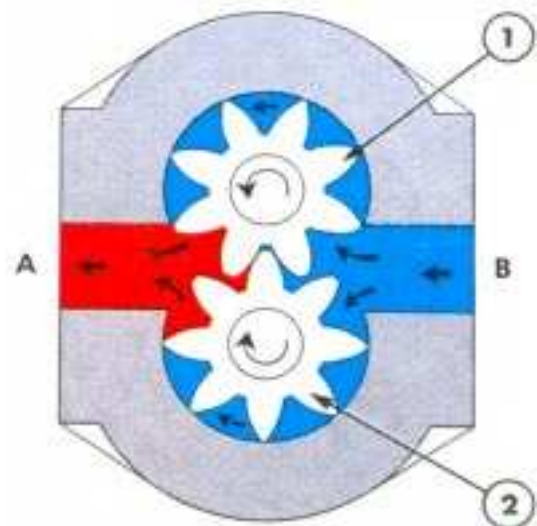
Cross-Section of Engine Mounted Hydraulic Gear Type Pump
